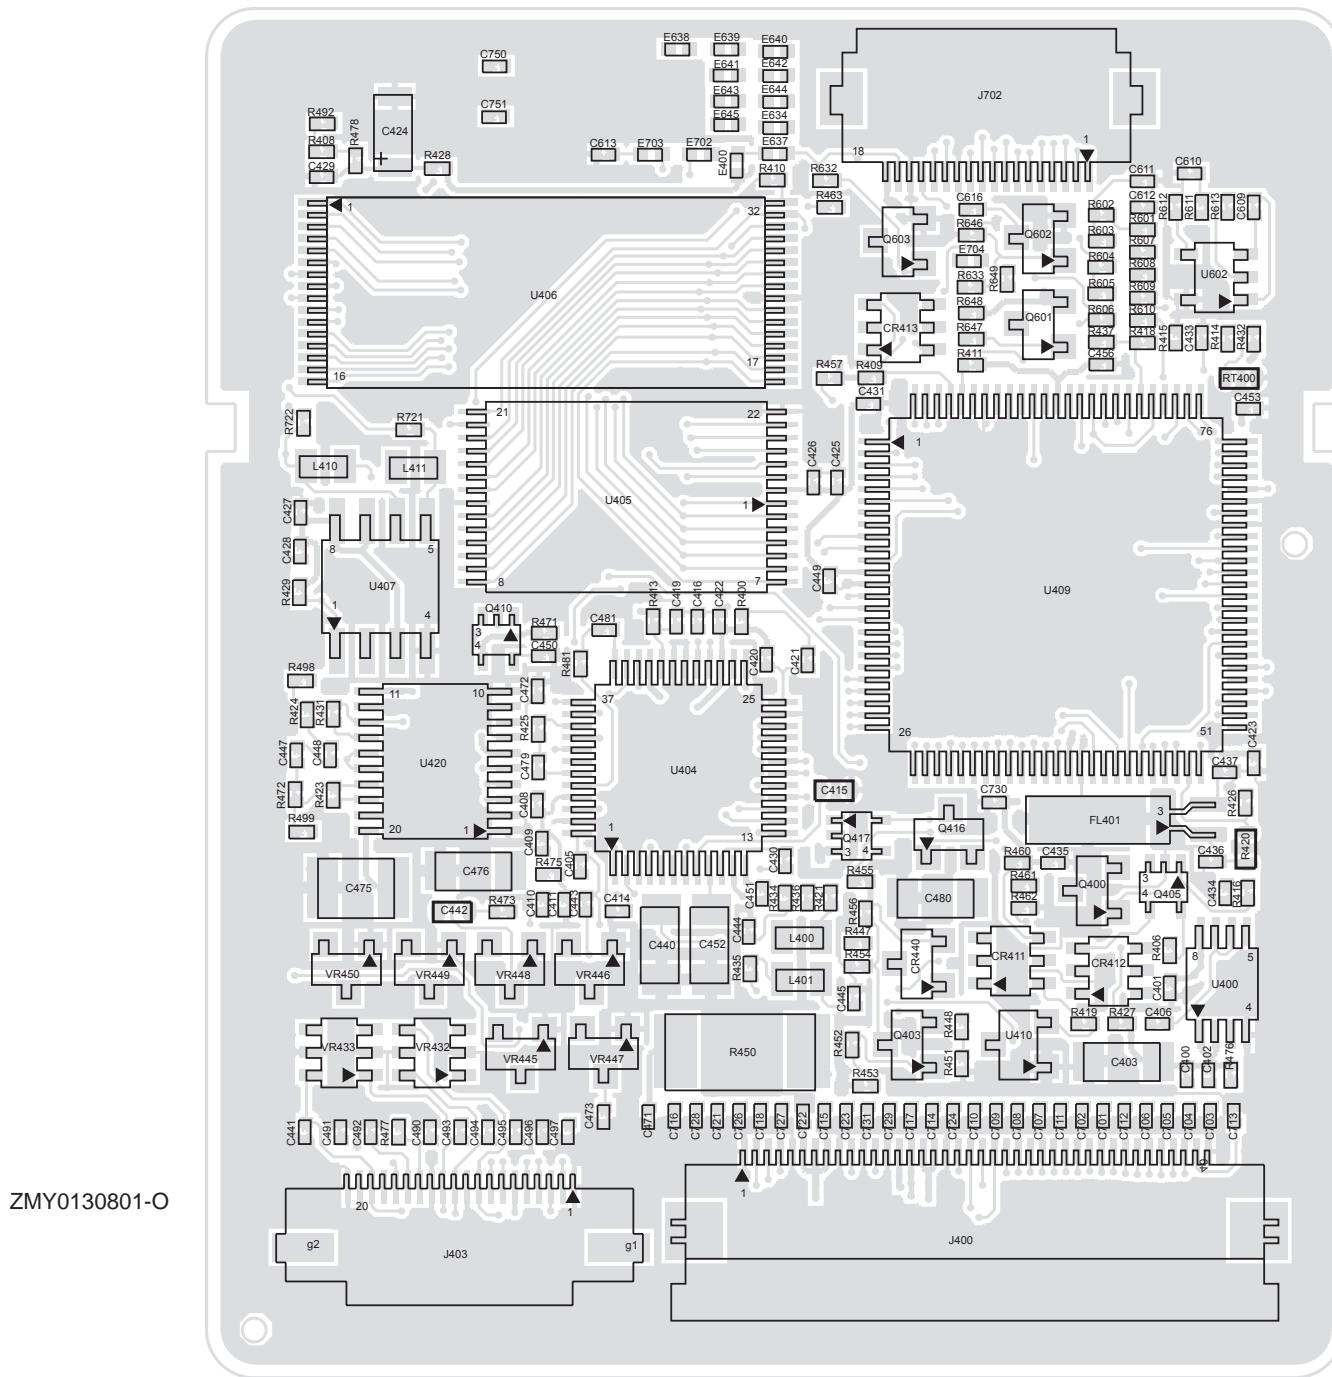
Controller Board Bottom View for VHF & UHF1 (PCB No.8404051G01)
